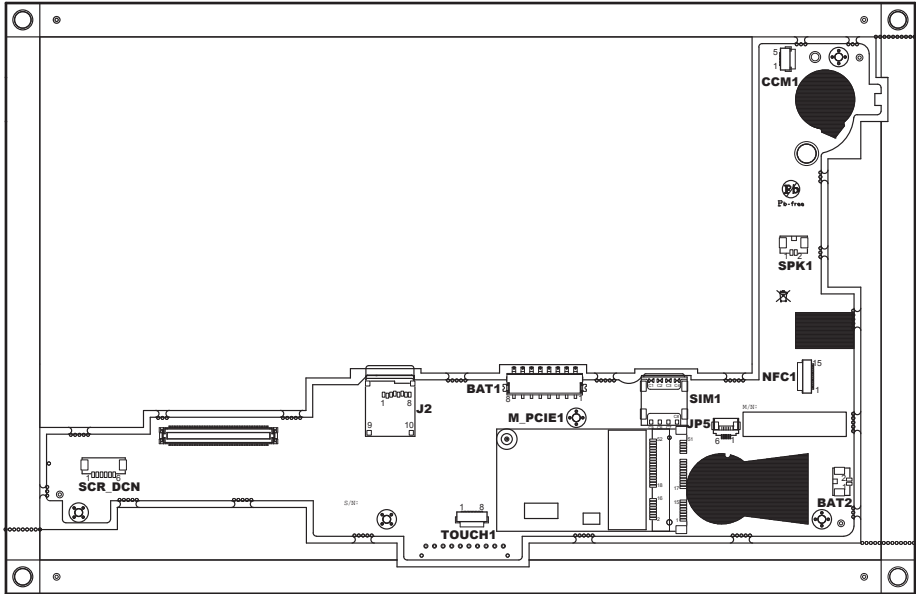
MR-5102RA-1 Daughter Board Component Locations (Bottom View)
